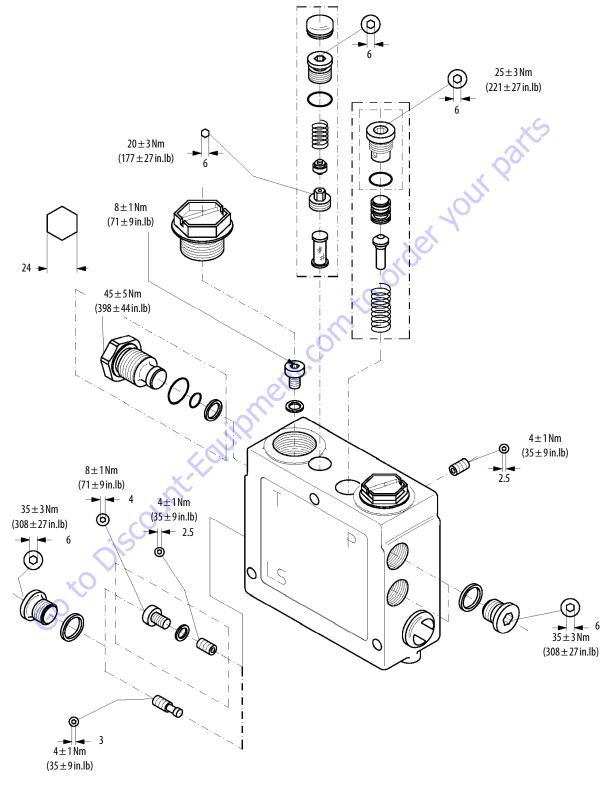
PVP Pump Side Module Torque Values & Tool Size
